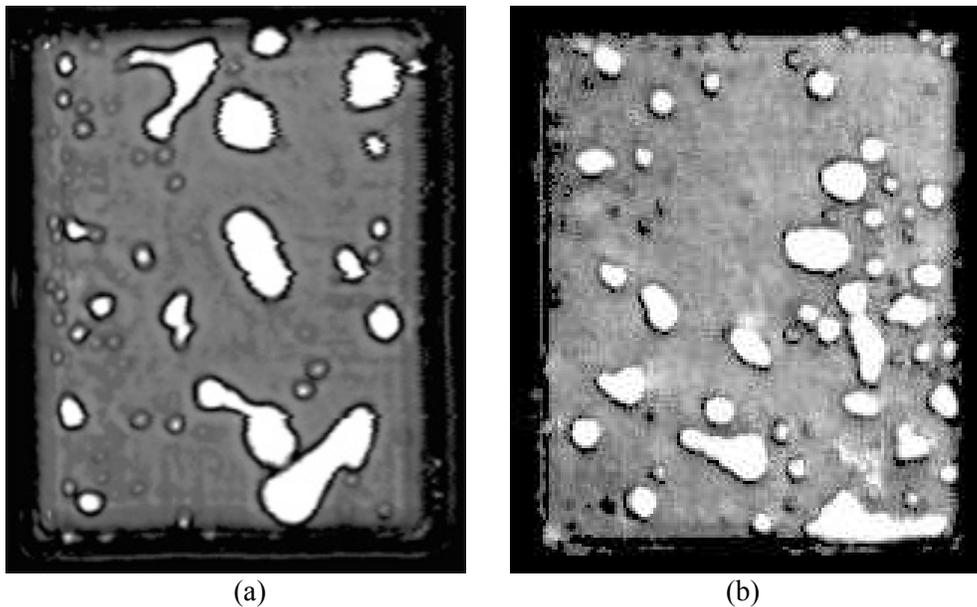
The initial void problems in the reflowed die-attaching solder layers in (a) lead-tin solder and (b) lead-free solder.
